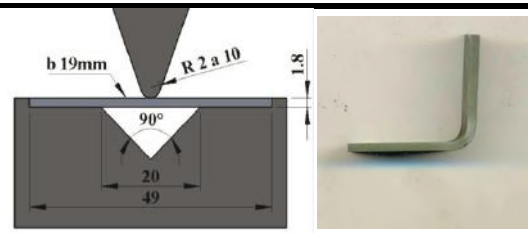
Schematic drawing of the tools for bending of V-sheets and part sheet.
